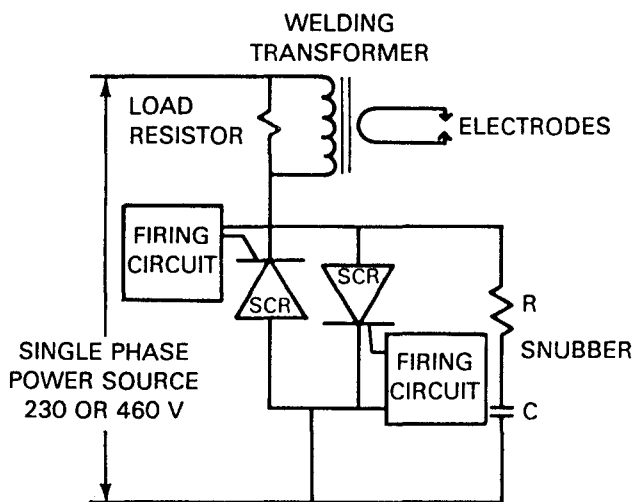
Single-Phase Welding Machine with a Pair of SCR Contactors
